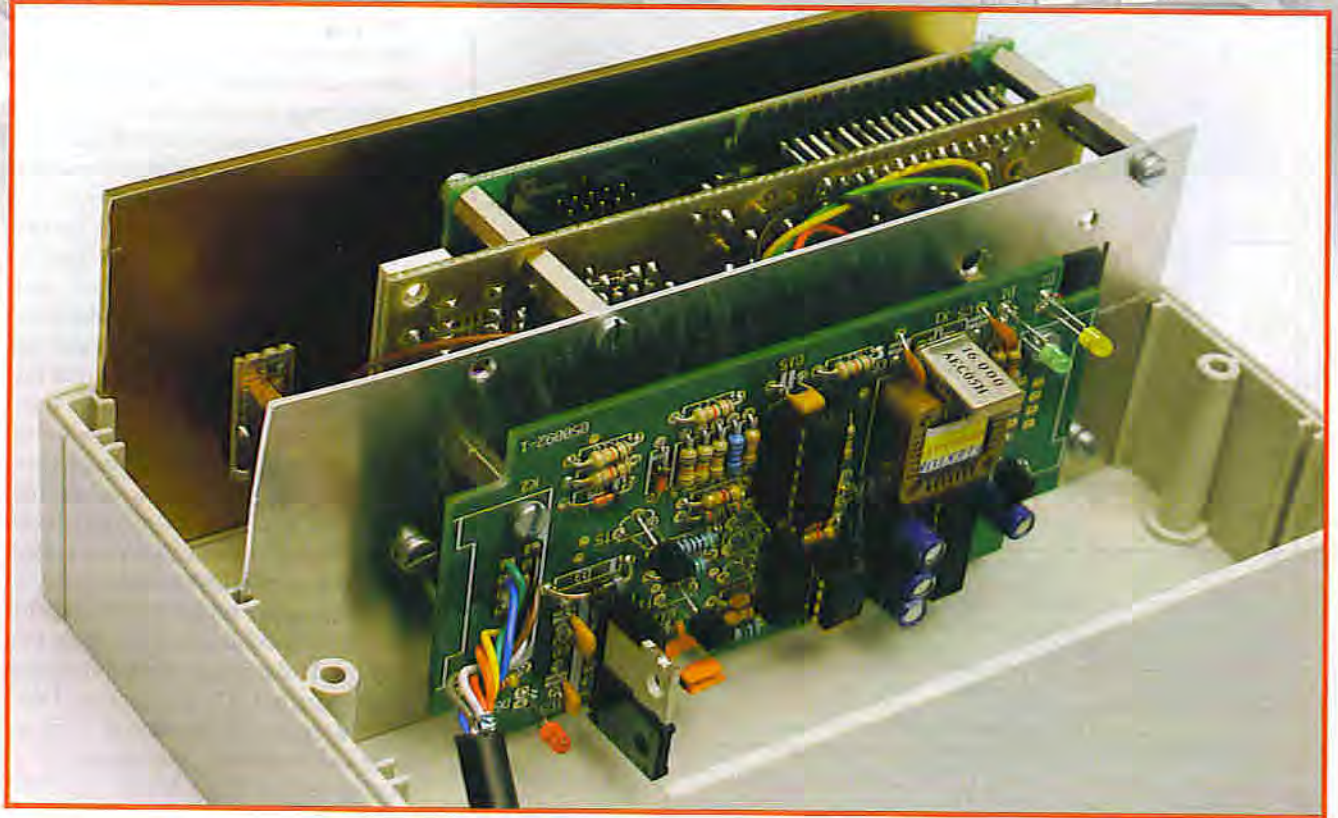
OBD-2 Analyser board and ATmega board after assembly.
